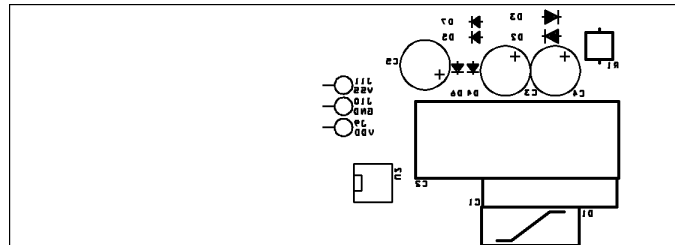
PCB Silkscreen Bottom Layer (Scale 1:1)
